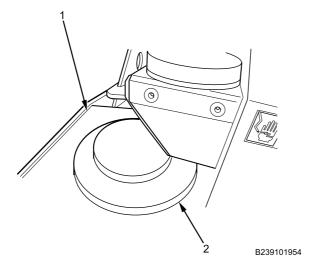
Overpressure Relief Valve Shield Assembly Mounting.
